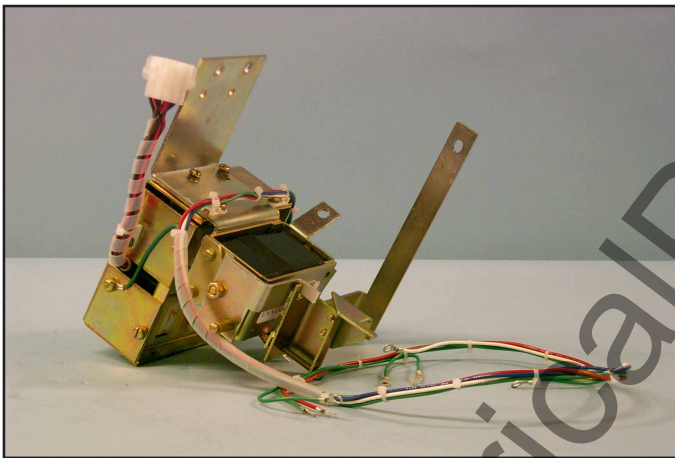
Aux. CT Module Mounted to the DTA Assembly and Sensor Harness Ground secured to the Aux. CT Module.
